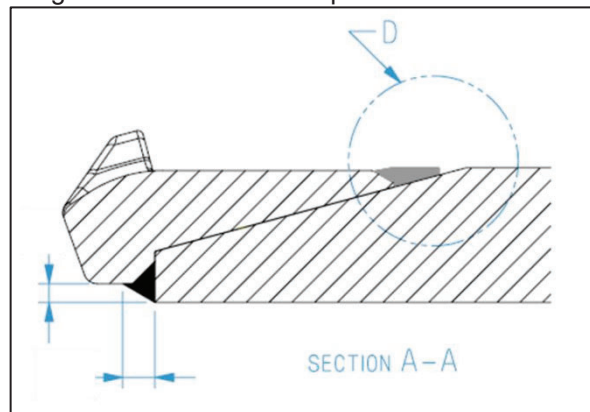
Excerpt – Excerpt from Weld Information drawing BU00037748
